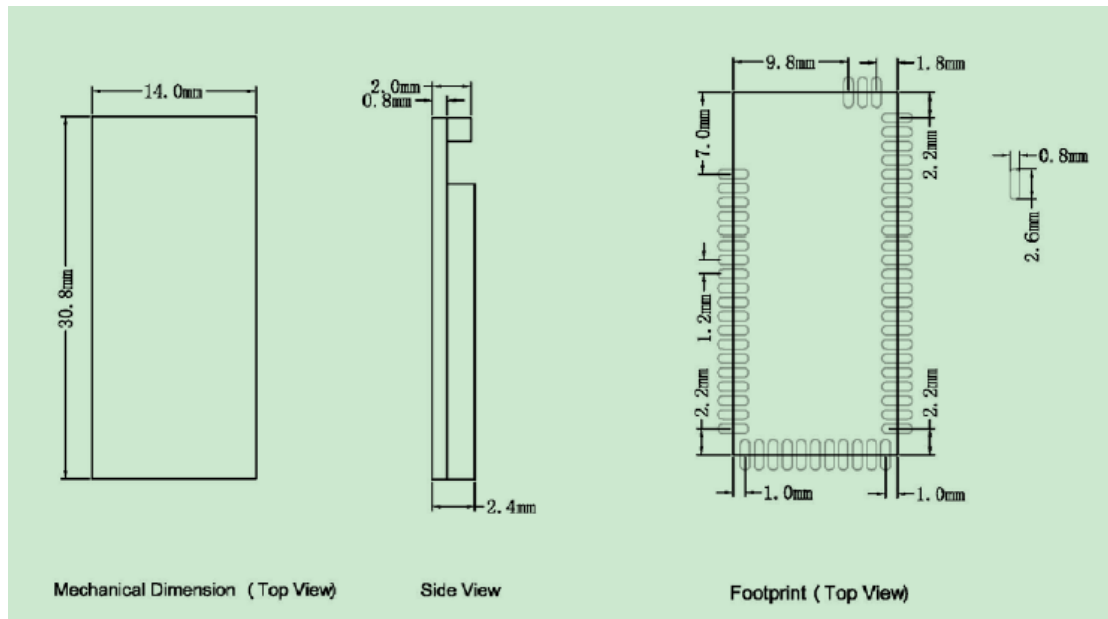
Recommended PCB Mounting Pattern (Unit: mm, Deviation:0.02mm)TOP View
